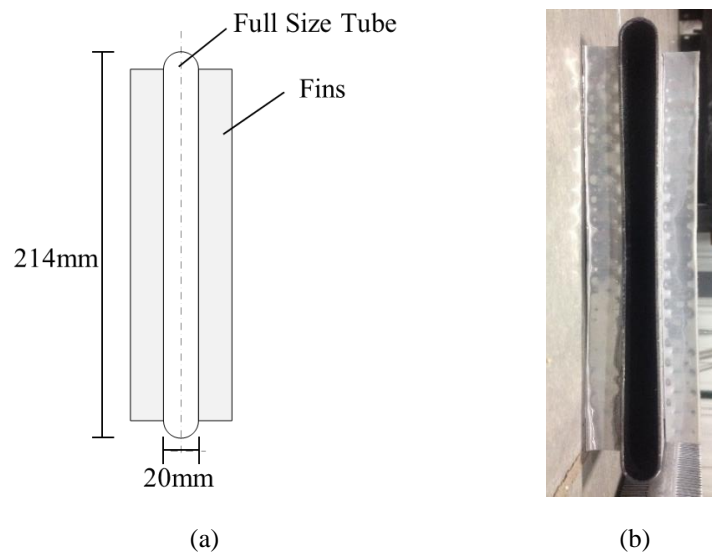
Cross-sectional View of Full-Size Flattened Tube: (a) Schematic, (b) Actual Photo
